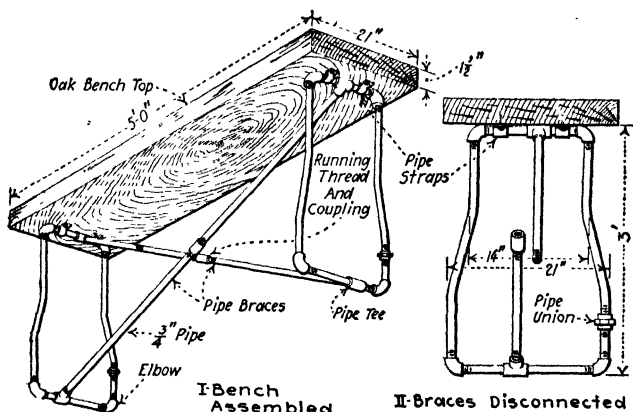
Portable and collapsible bench made of standard pipe or conduit and pipe fittings. If more stability is desired the width of the bottom of each stand may be made larger than shown.
